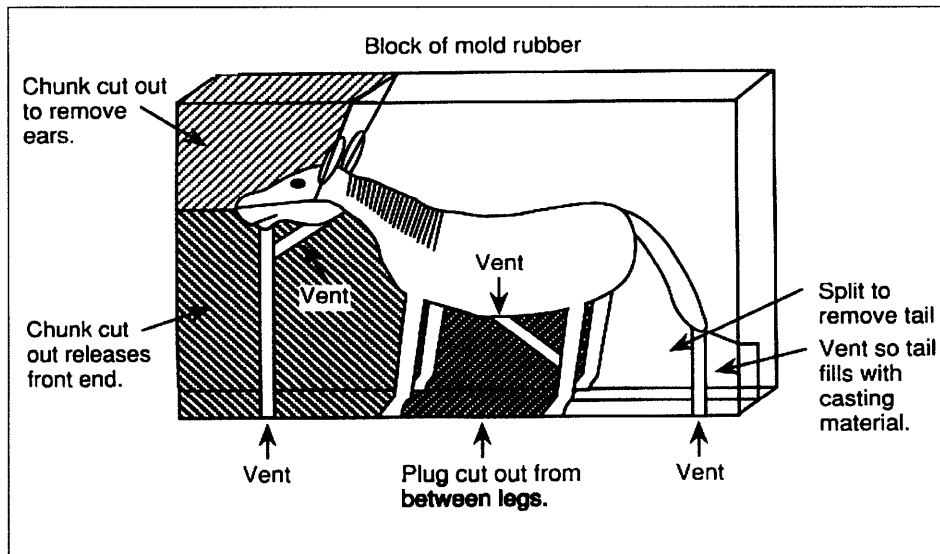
Multi-part Poured Mold [10]. Molds for more complicated parts can be created by cutting a poured mold into multiple parts and putting it back together within a mold box for casting parts.
